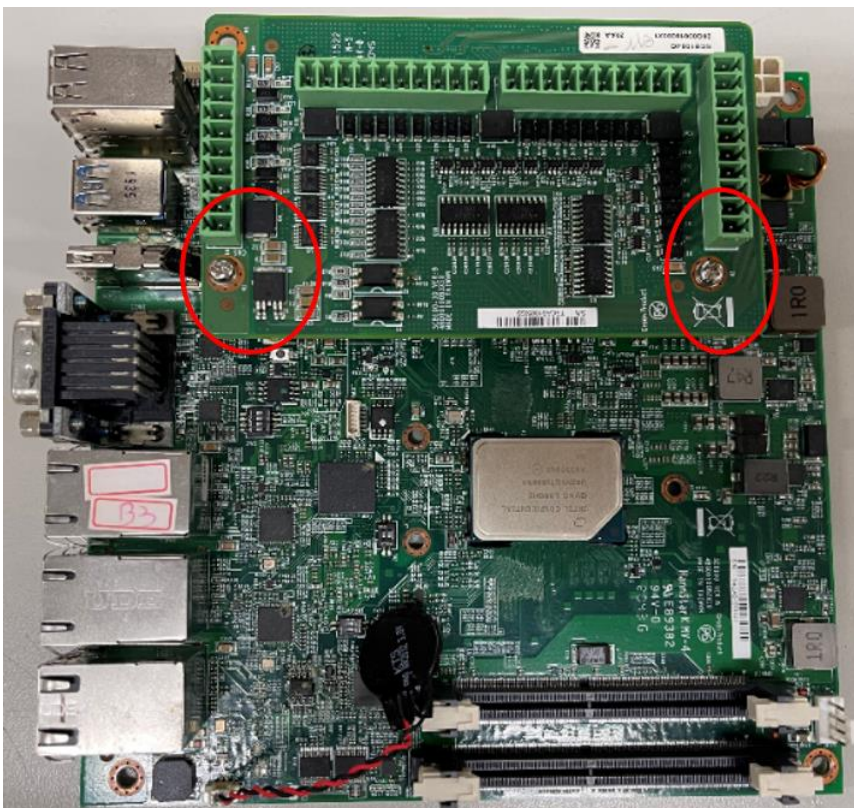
Round head screw W/Spring + flat washer long fei :P3x7L - 1
